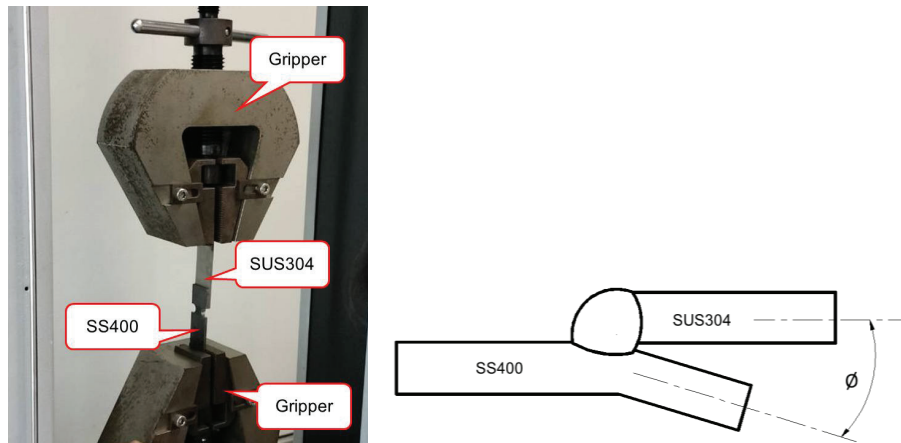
(a) tensile-shear strength test on universal testing machine (b) Bent angle measurement.
